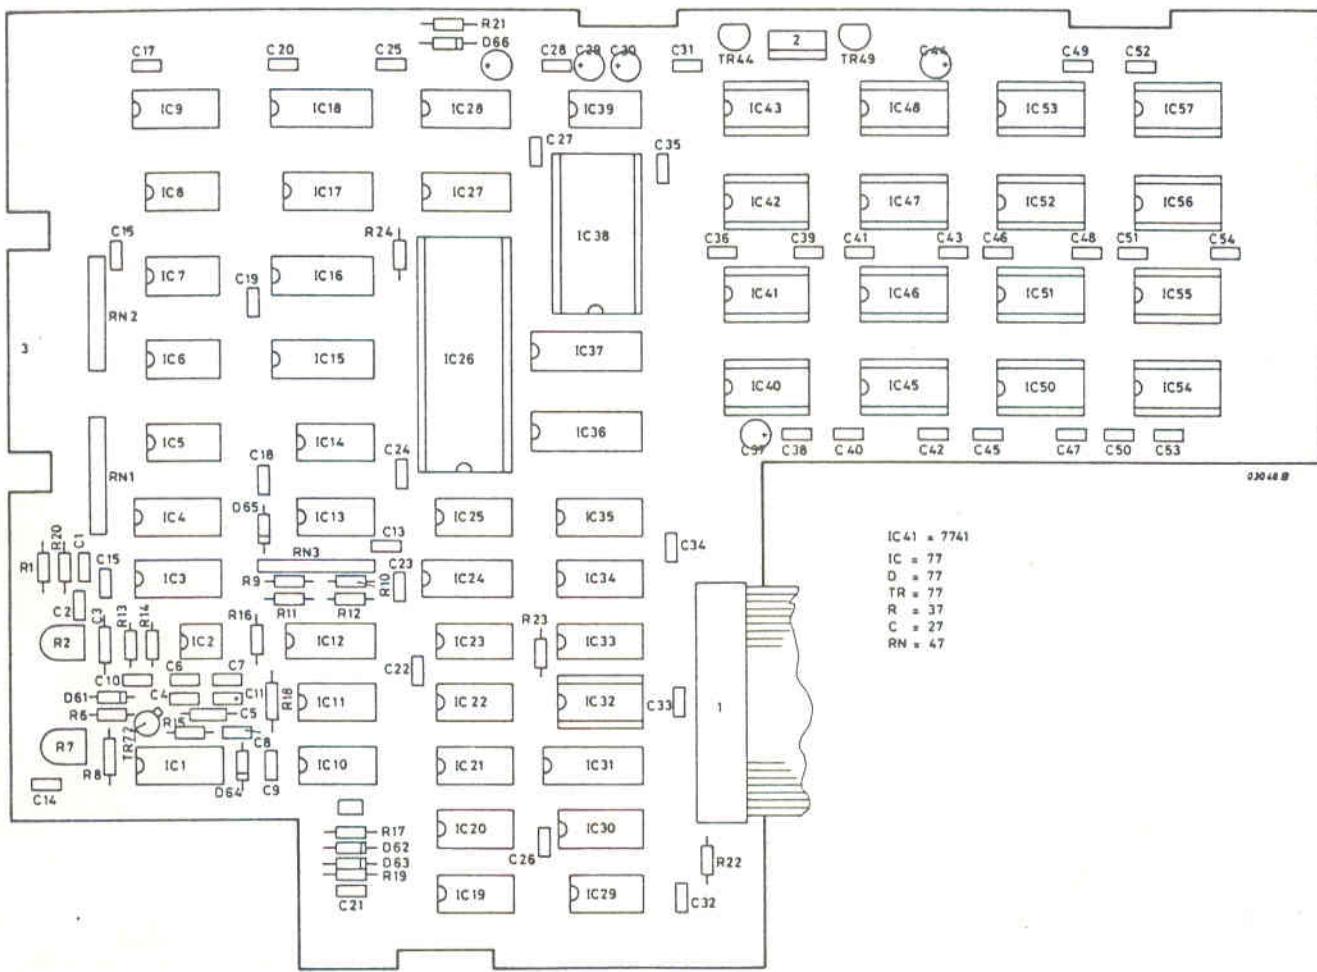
COMPONENT LAYOUT EXTENSION BOARD
